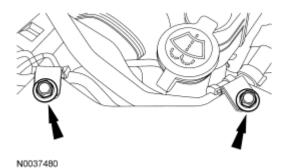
Locating A/C Tube Bracket Bolts Courtesy of FORD MOTOR CO.
